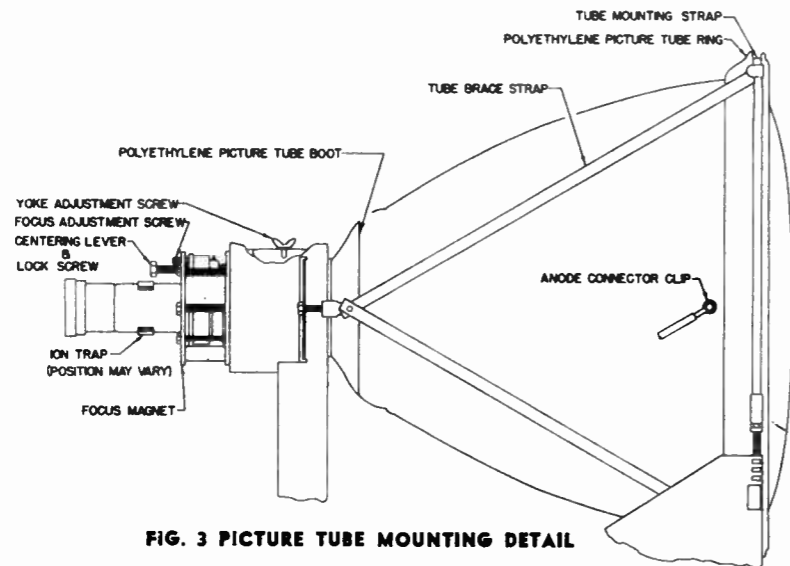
PICTURE TUBE MOUNTING DETAIL
